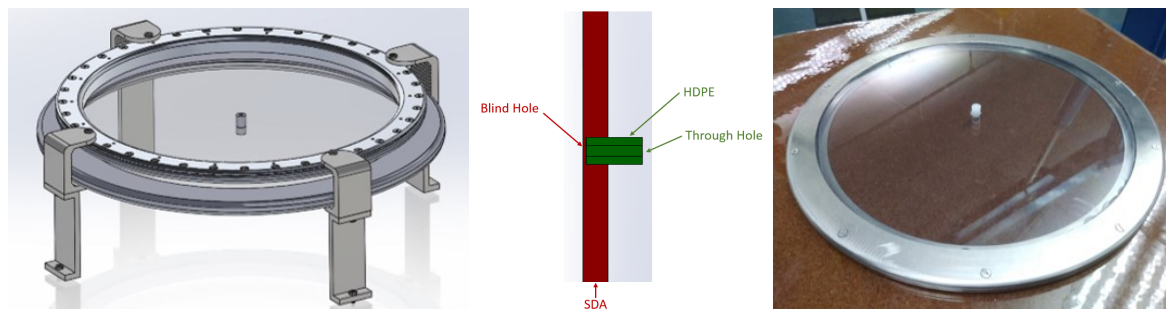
Left: assembled DEMO++ compatible assembly. Center: Connection of SDA with vented support post. Right: Fully assembled NEXT-DEMO sized SDA prototype anode with support post inserted.
